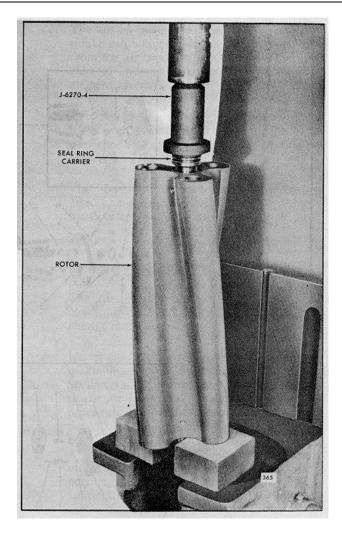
Installing Oil Seal Ring Carrier on Blower Rotor Shaft (Turbocharged Engine Blowers)
